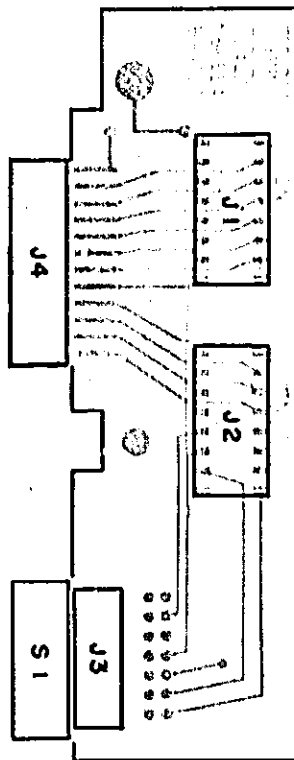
HP-IB Connector Board Assembly Component Locations.
